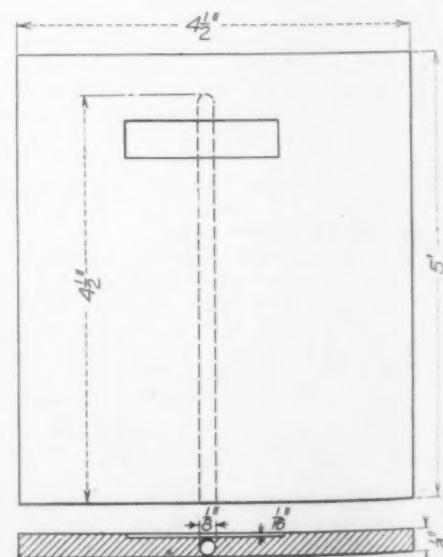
Sample of Pure Copper Casting for X-Ray Examination, End View and Plan
